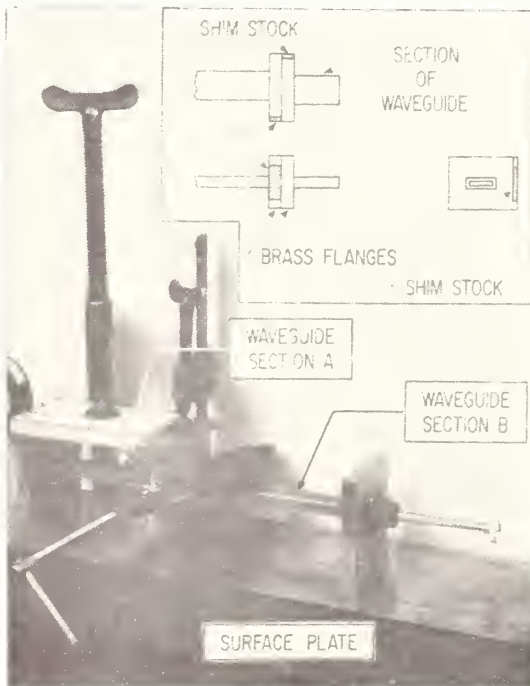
Photograph of alignment and clamping apparatus for waveguide joint.
